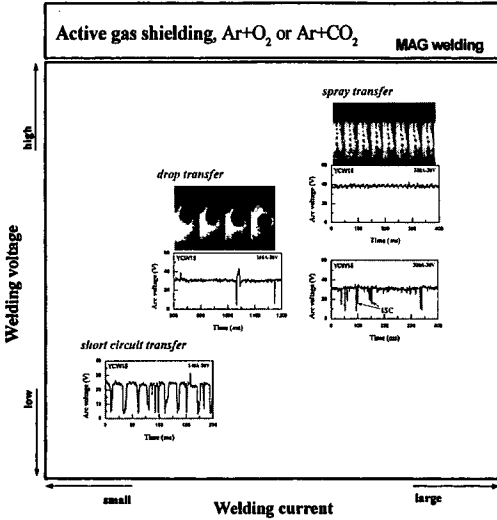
Droplet transfer phenomena of MAG welding
